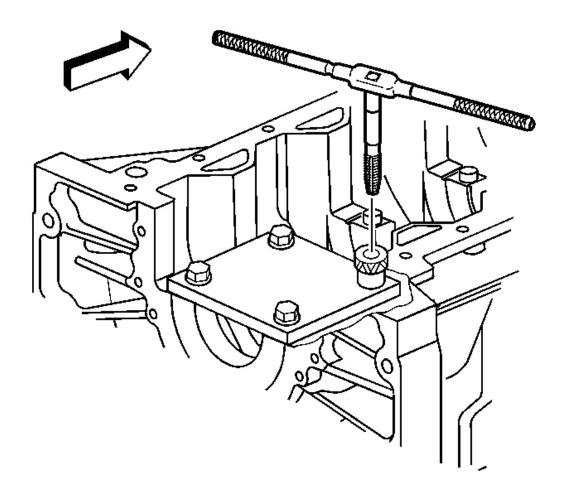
Tapping Threads Using Tapping Wrench - Crankshaft Main Bolt Hole Thread Repair
